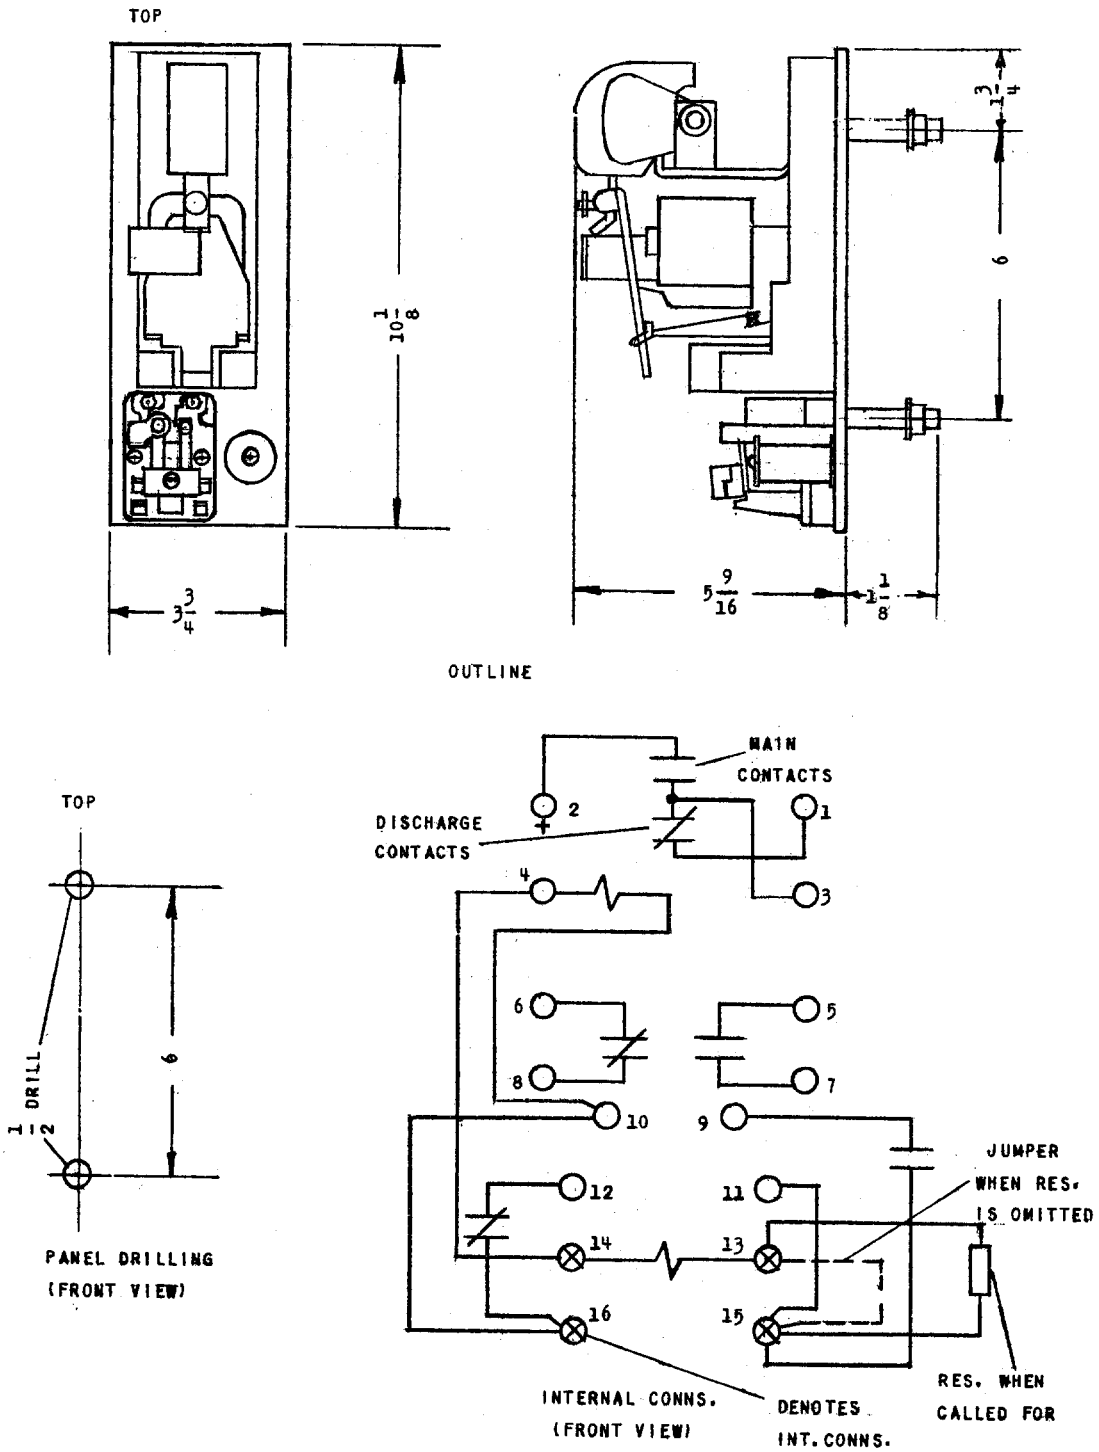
Outline, Panel Drilling And Internal Connections For Type HKA29HM Relay
